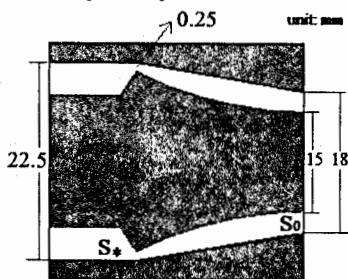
The sketch of the gas puff on Qiangguang (unit: mm).
